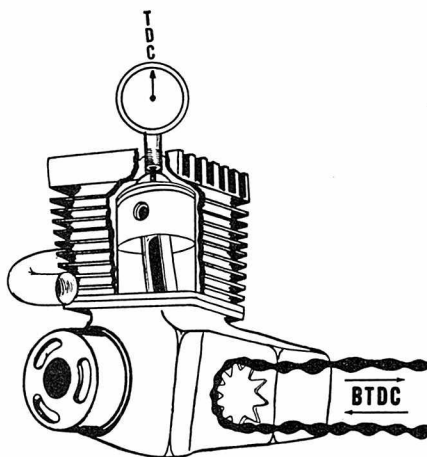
On some engines, it will be necessary to measure piston travel with rule, dial indicator or special timing gage when adjusting or checking ignition timing. Arrows show direction to move chain to position piston Before Top Dead Center after TDC has been located.
